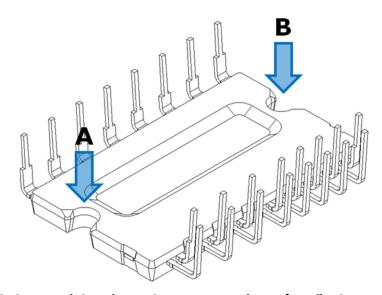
Reommended screw tightening order: Pre-screwing A  $\rightarrow$  B, final screwing A  $\rightarrow$  B
